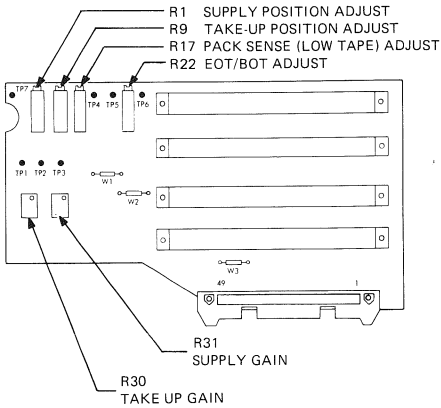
Interconnect F PCBA Adjustments and Test Points
